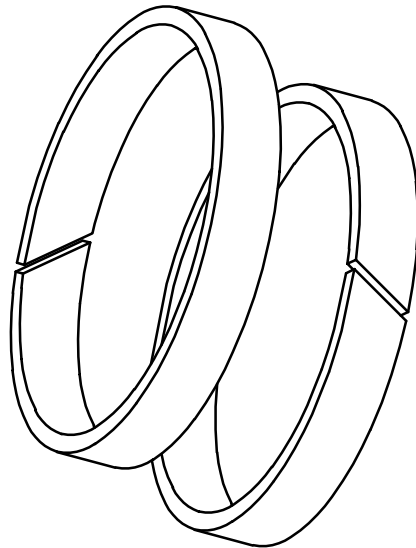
Typical example of a rectangular-cut-section bearing ring
